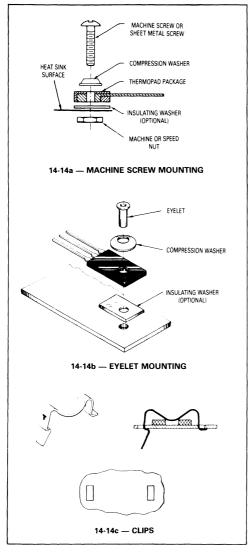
RECOMMENDED MOUNTING ARRANGEMENTS FOR TO-225AA (TO-126) THERMOPAD PACKAGES
